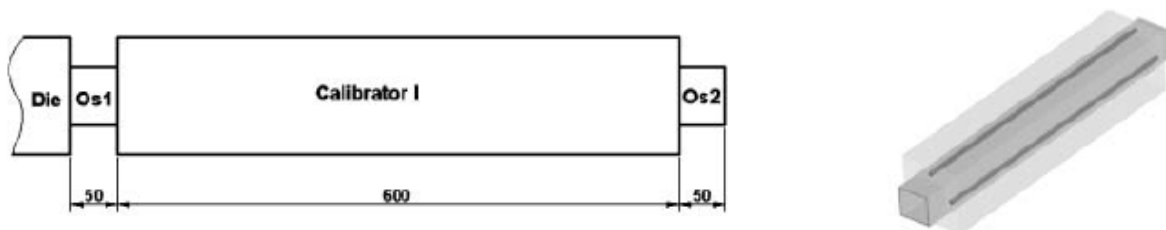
Geometry of the one calibrator layout (dimensions in mm), Nóbrega J. M. et al. (2004)
